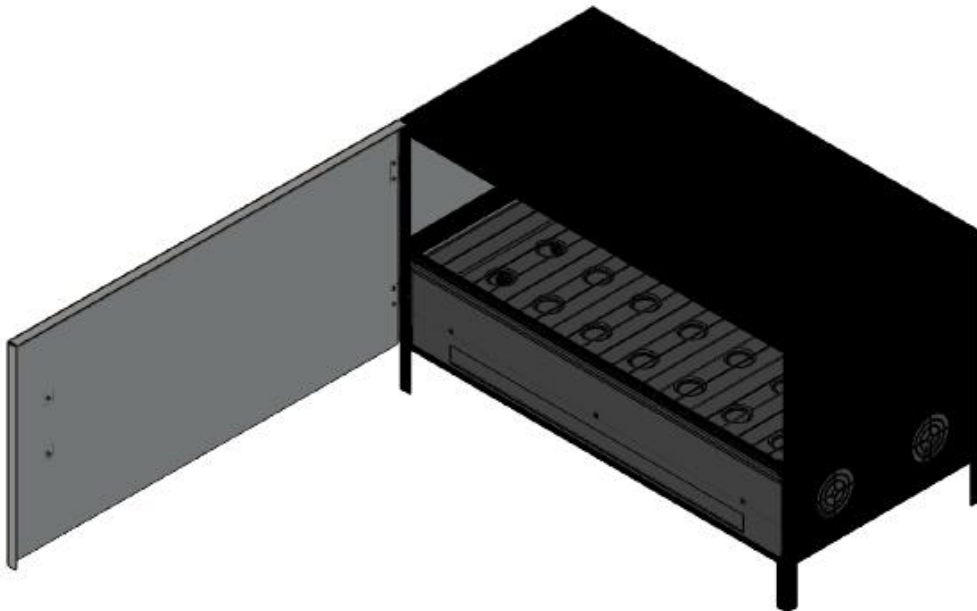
INITIAL DESIGN CHARCOAL BREAD BAKING SYSTEM
